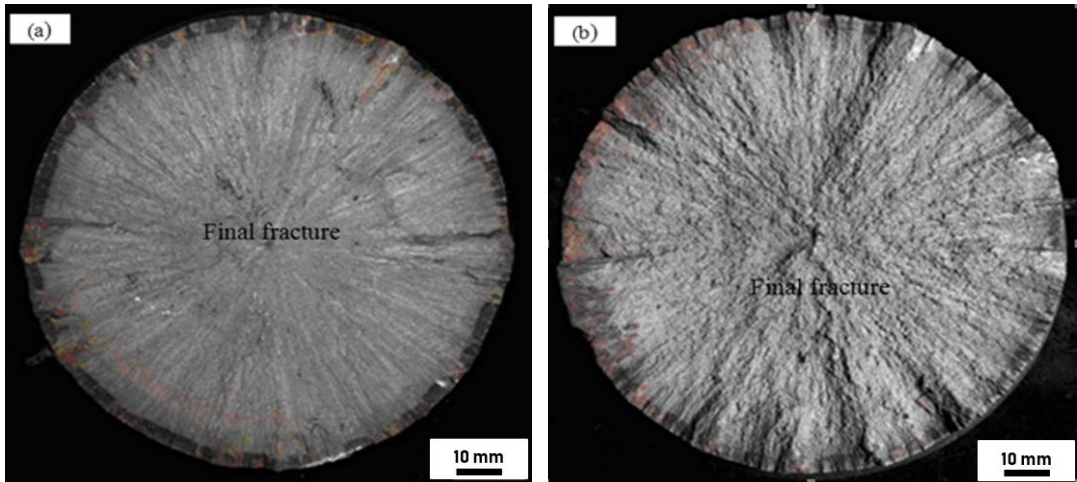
Fracture surfaces of the failed roll (a) drive side (b) top side
